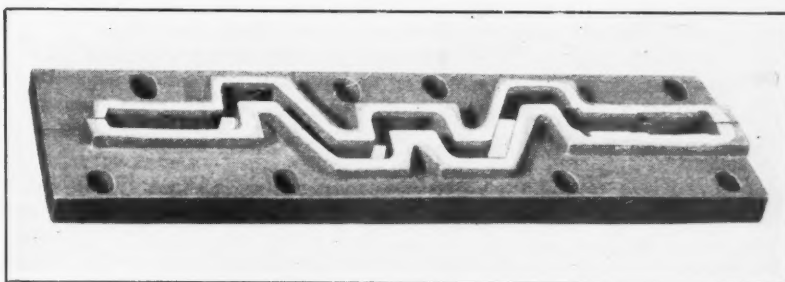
Typical Crankshaft Trimming Die with the Cutting Edges stellite
